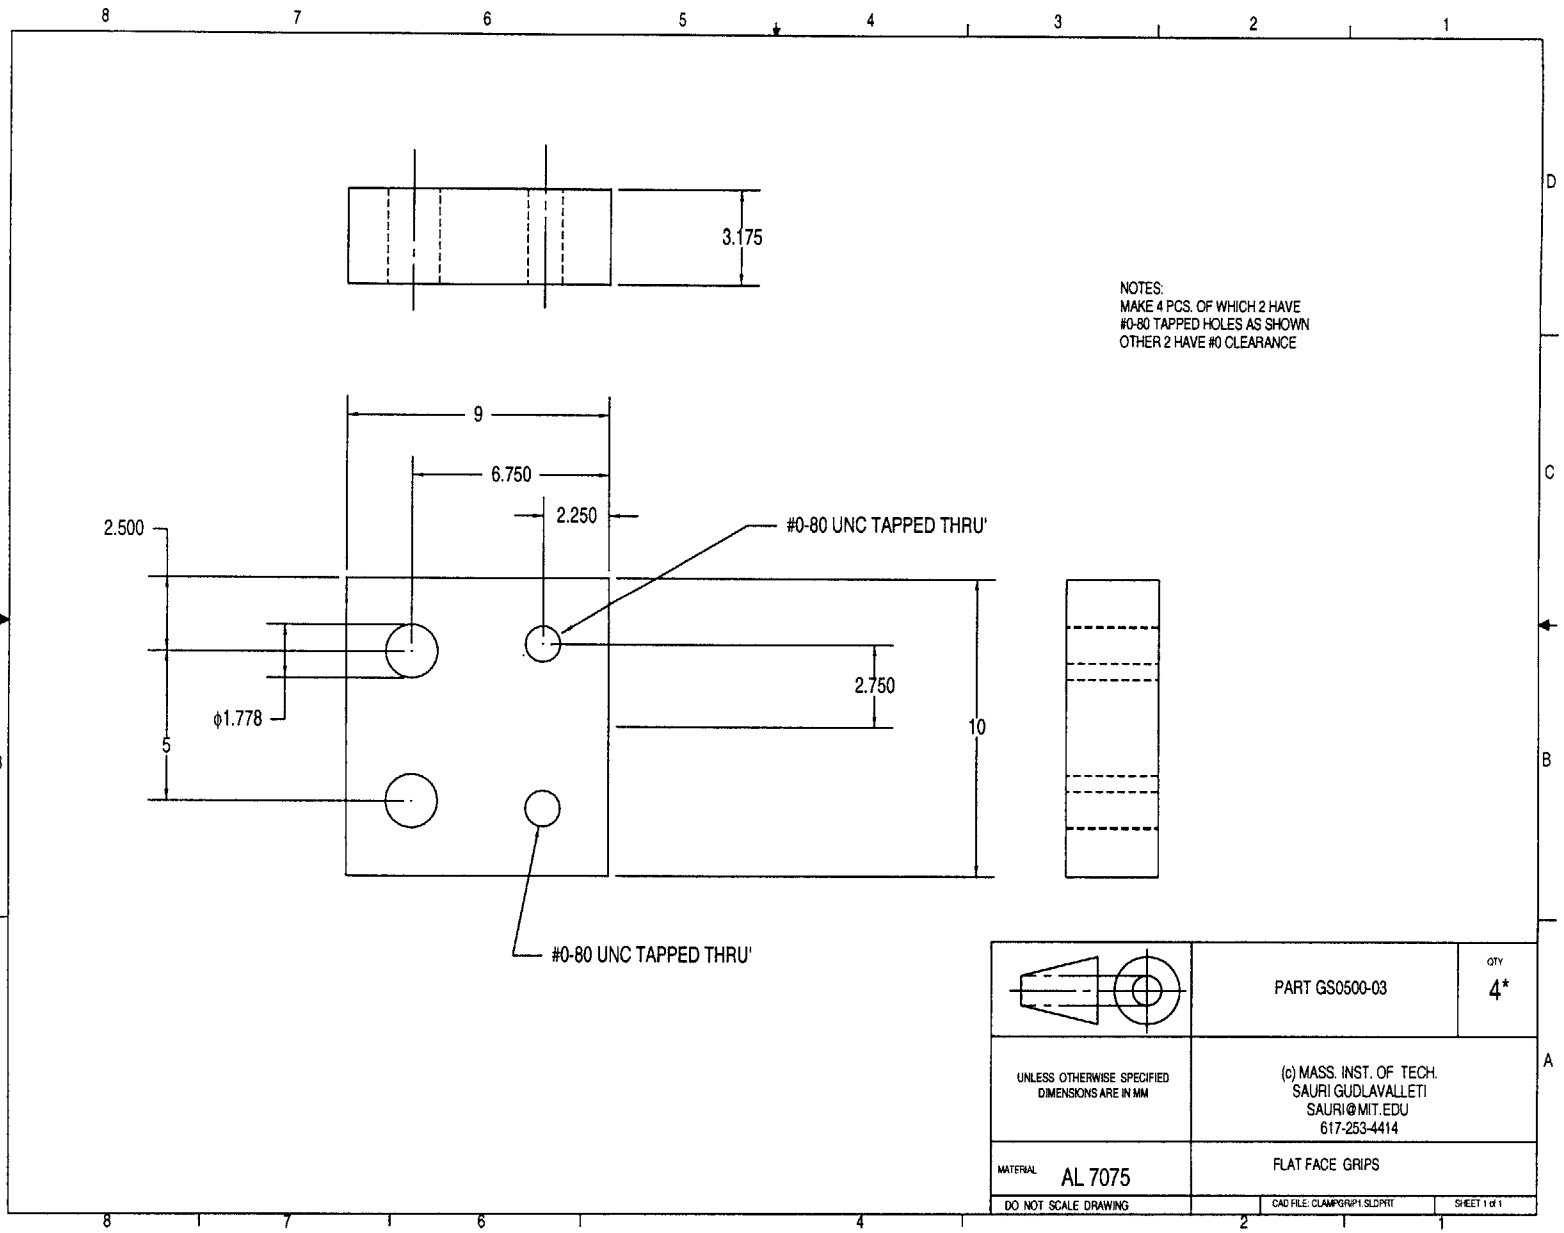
Part GS 0500-03. Flat faced clamps for foil specimens.
